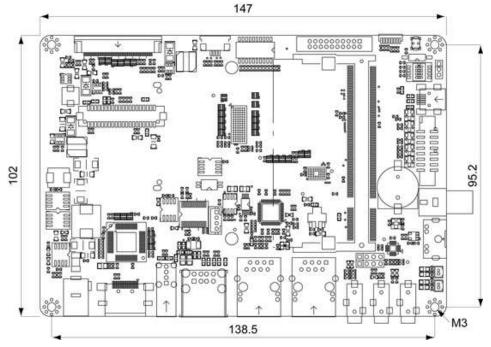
Twister baseboard dimensions (Dimensions in mm)
